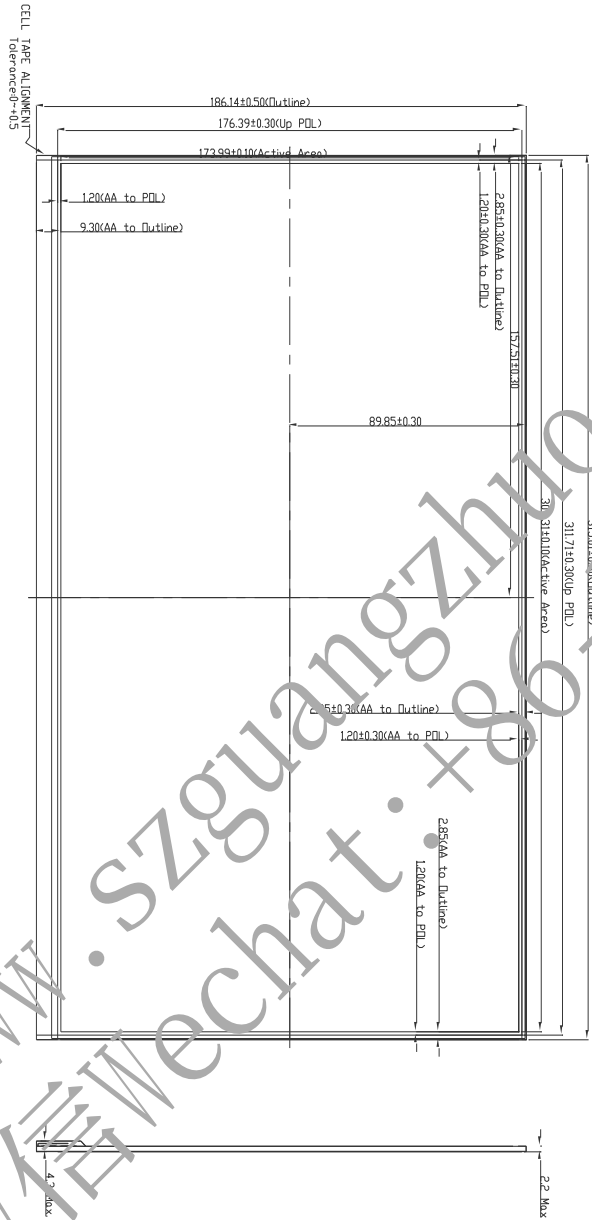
TFT-LCD Module Outline Dimension (Front View)
